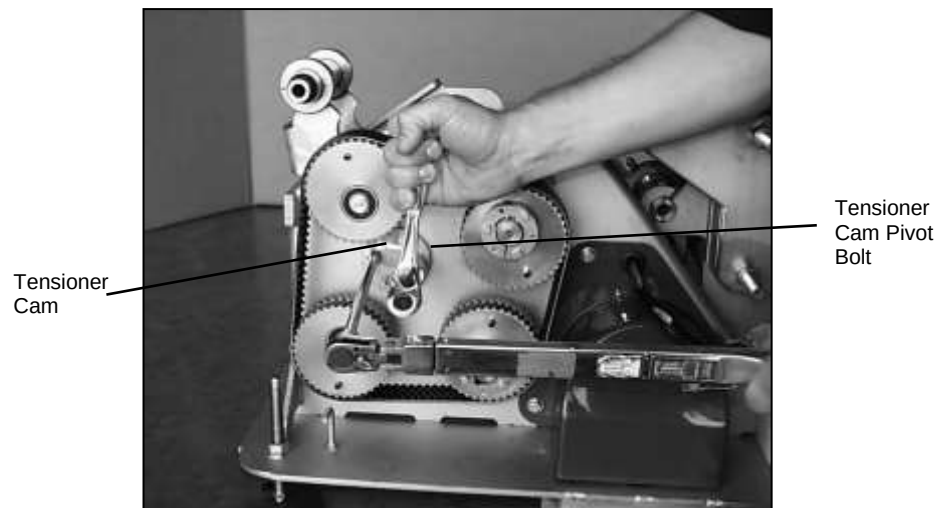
Tightening the Tensioner Cam and Tensioner Cam Pivot Bolt
